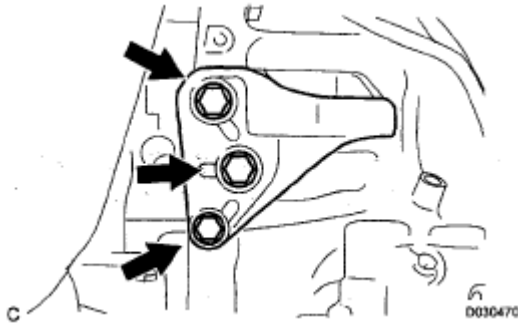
Locating Engine Mounting Bracket Bolts (Front)
